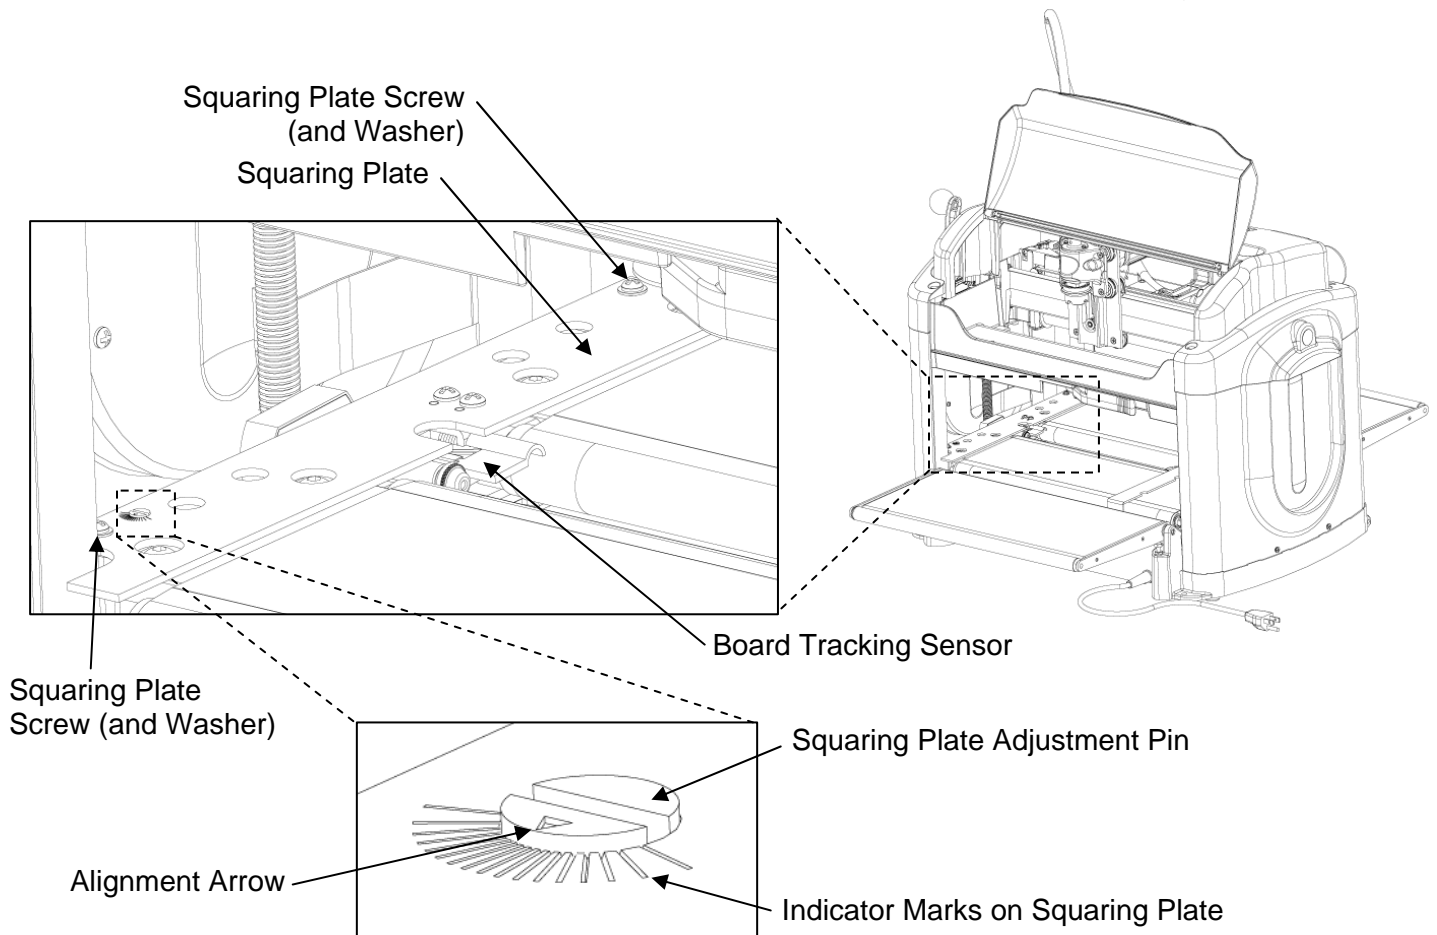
DETAILED VIEW OF THE SQUARING PLATE ATTACHMENT
